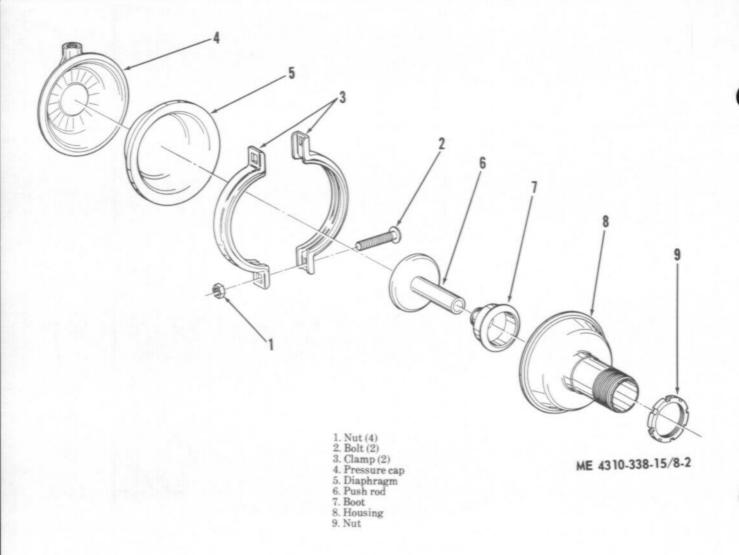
Service chamber assembly; disassembly and reassembly.
